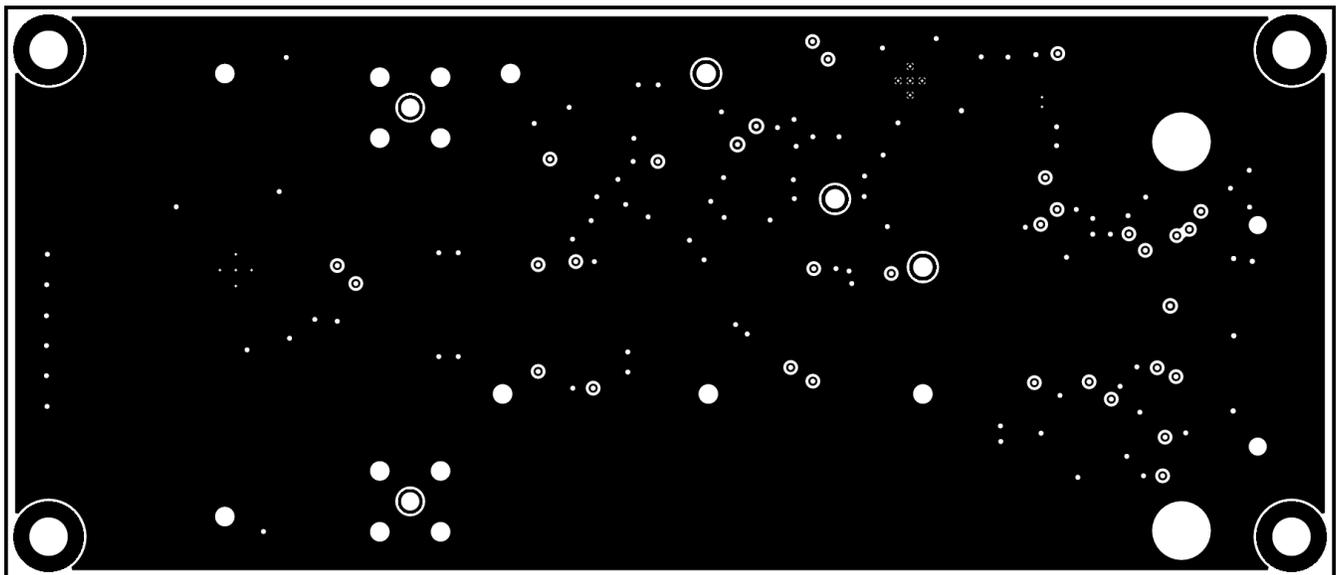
REF6025EVM PCB Layer 2: GND Plane
